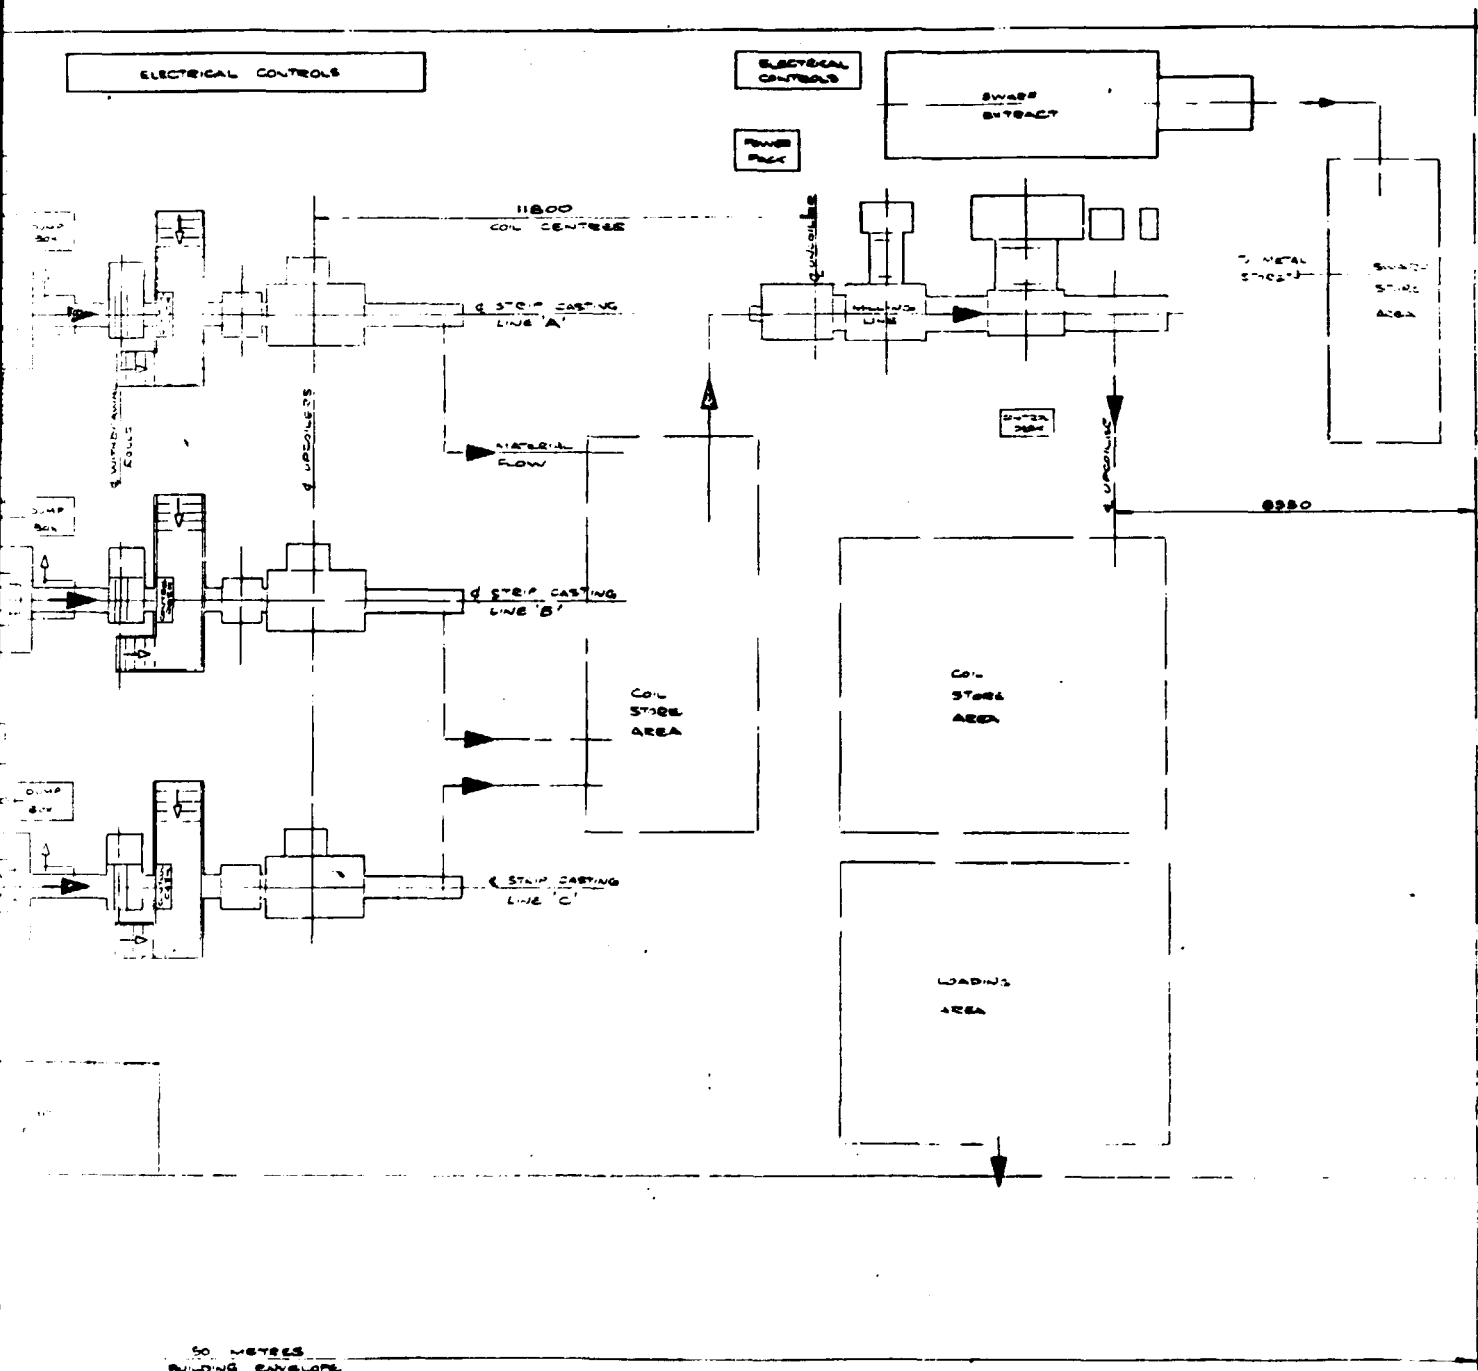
STRIP CASTING PLANT LAYOUT
